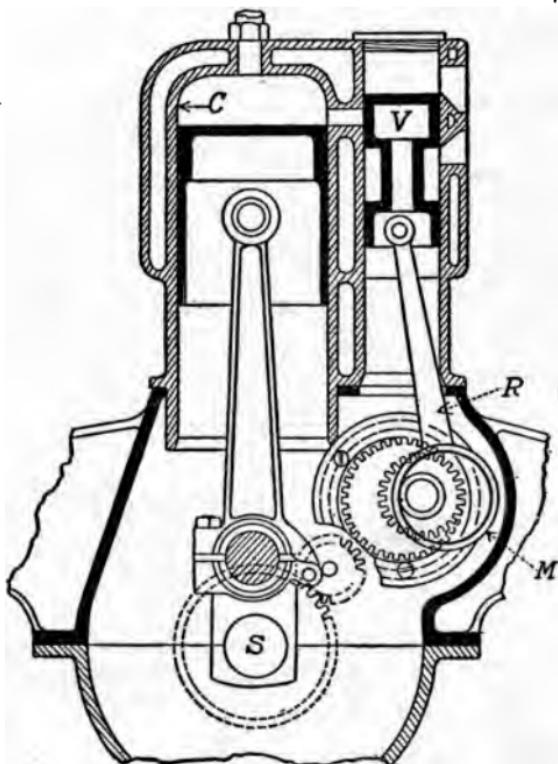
Section of a type of engine having a reciprocating piston valve operated by an eccentric on the second shaft. C is the cylinder wall; V, the piston valve; R, the valve rod; M, the eccentric; S, the crank-shaft. With the valve at the bottom of its stroke the exhaust is open; at the top the inlet is open.
